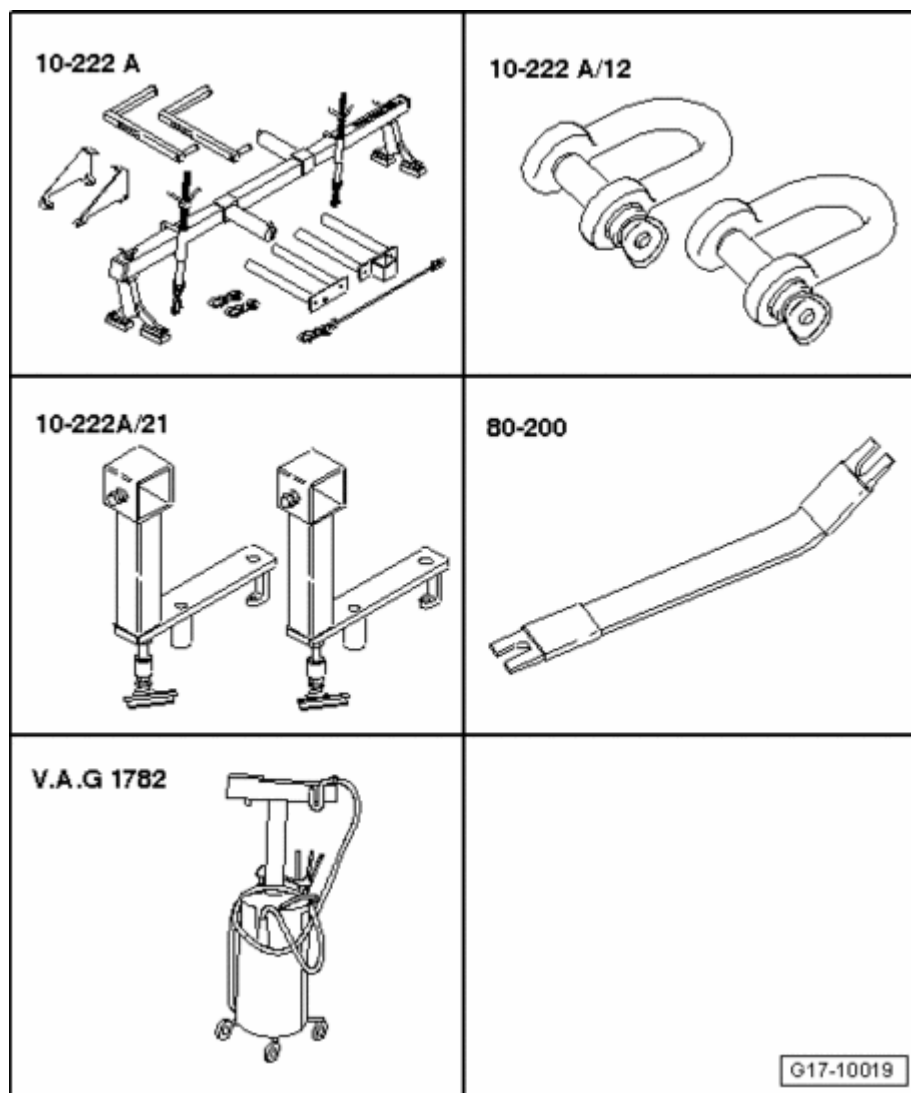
Identifying Special Tools - Oil Pan (Upper Part), Removing And Installing
